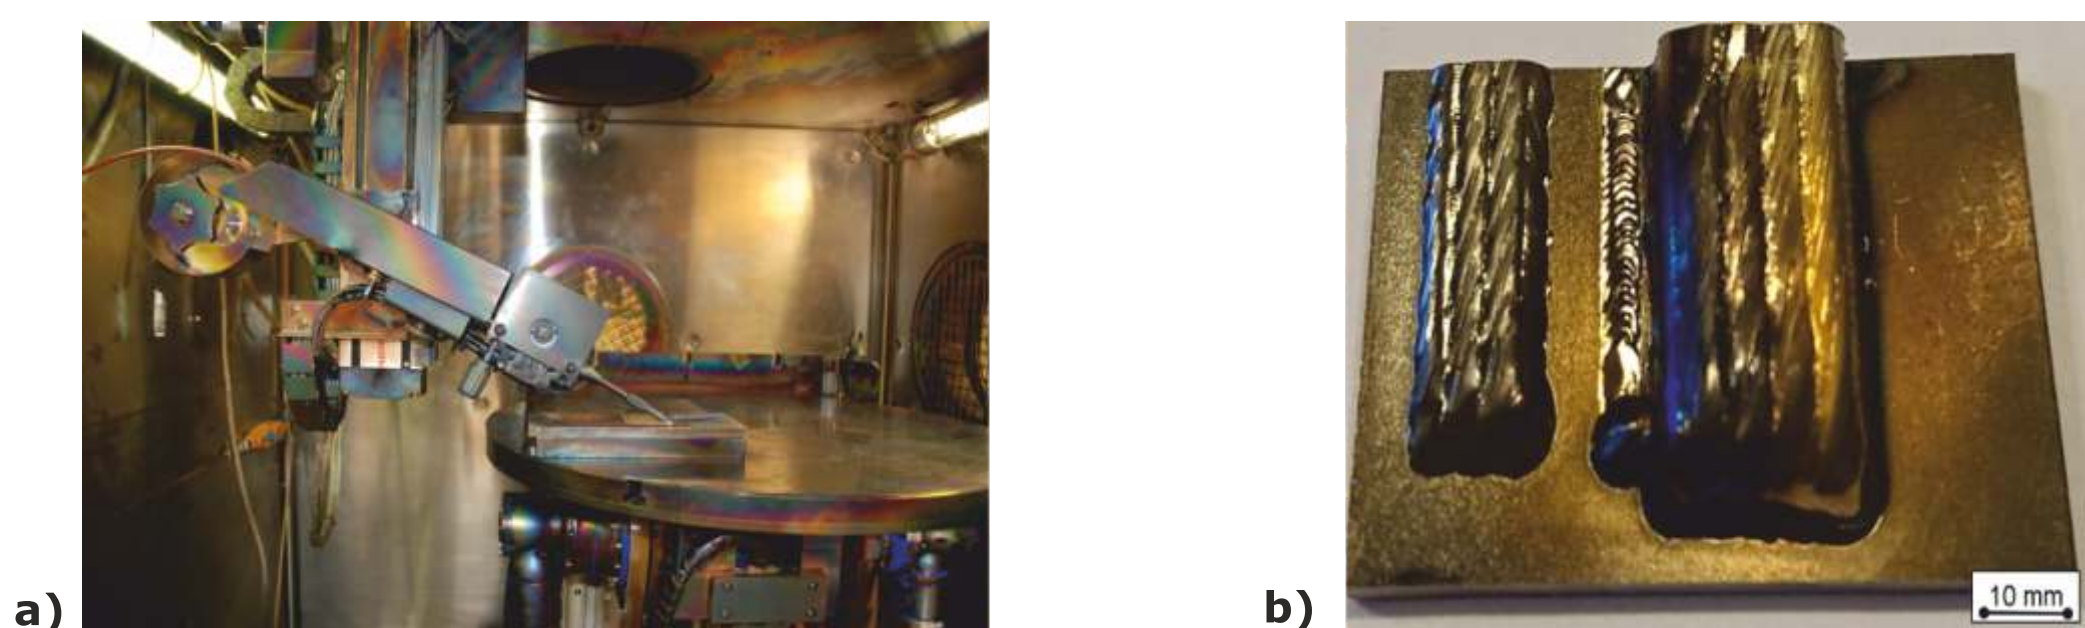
a) general view of chamber of XW150:30/756 EBAM machine, b) EBAM part of NiTi alloy
